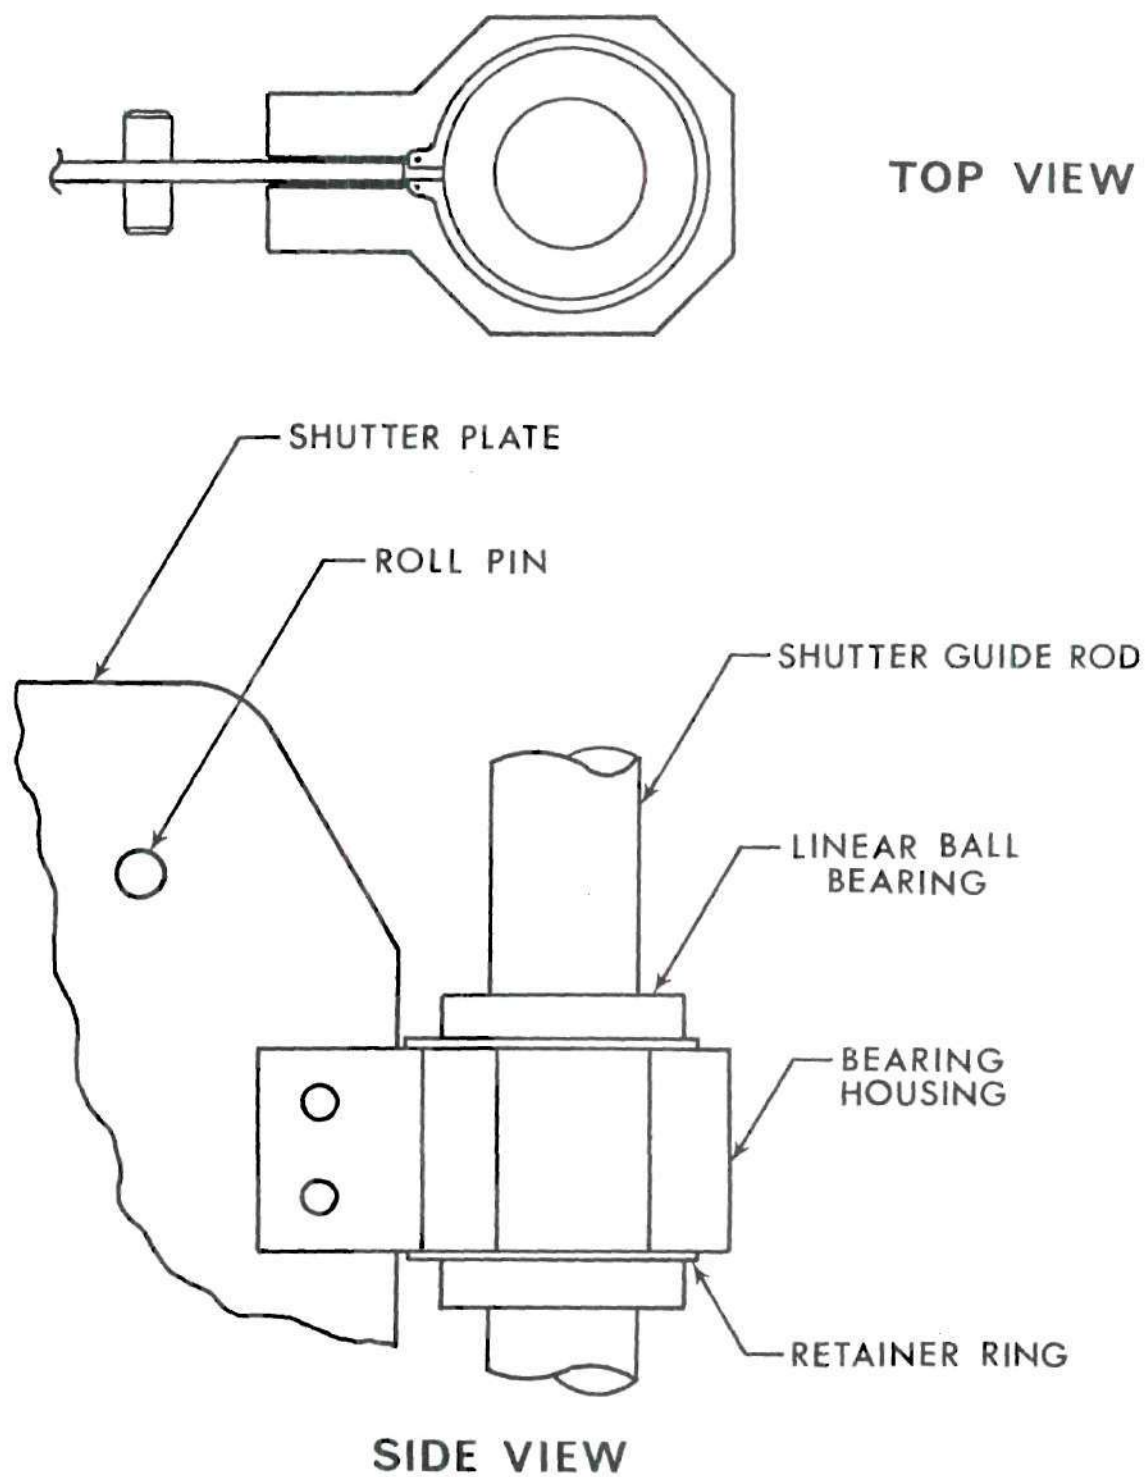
Top and Side Views of the Bearing Assembly for Shutter Travel and Guide
